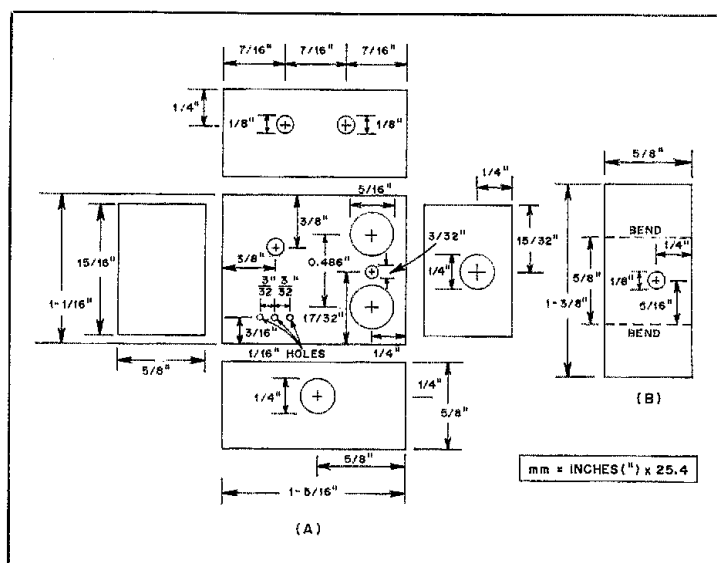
The five pieces of circuit-board material used to form the box are cut and drilled as shown in A before the box is assembled. The heat sink, B, is made from 1/16-inch aluminum or brass.
